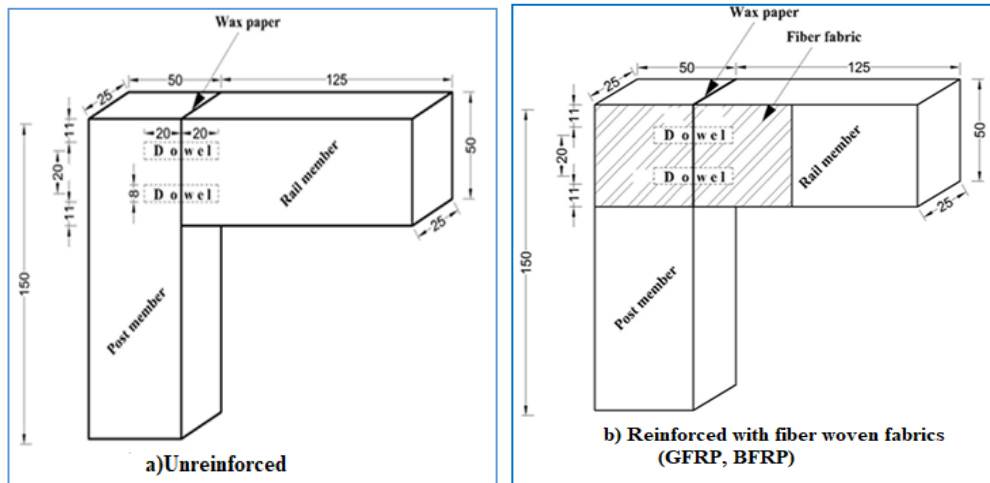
General configuration of L-shaped joint specimens (dimensions in mm)
